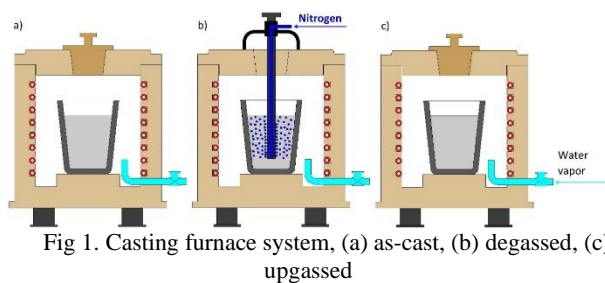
Casting furnace system, (a) as-cast, (b) degassed, (c) upgassed
